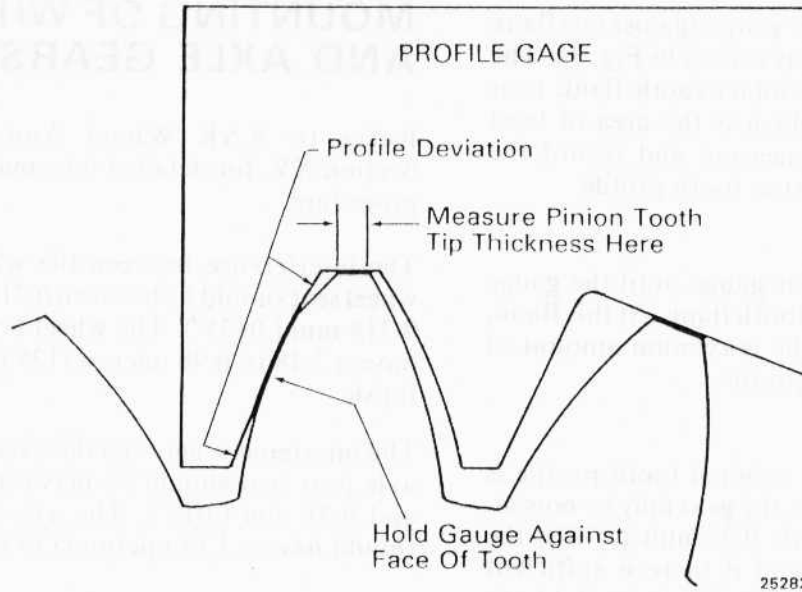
Measuring Profile Deviation And Wear Of Traction Motor Pinion
